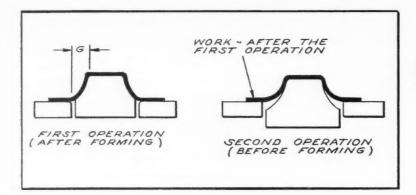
Drawing concave tapered parts is difficult because the gap (G) is sustained for a large part of the draw. Often two or more forming operations are necessary
